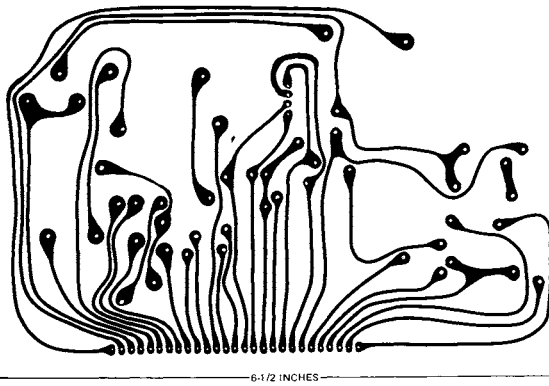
THE COMPONENT SIDE OF BOARD 1. Note the pads for the male header at the bottom of the pattern. Once again this board is shown half-size.
